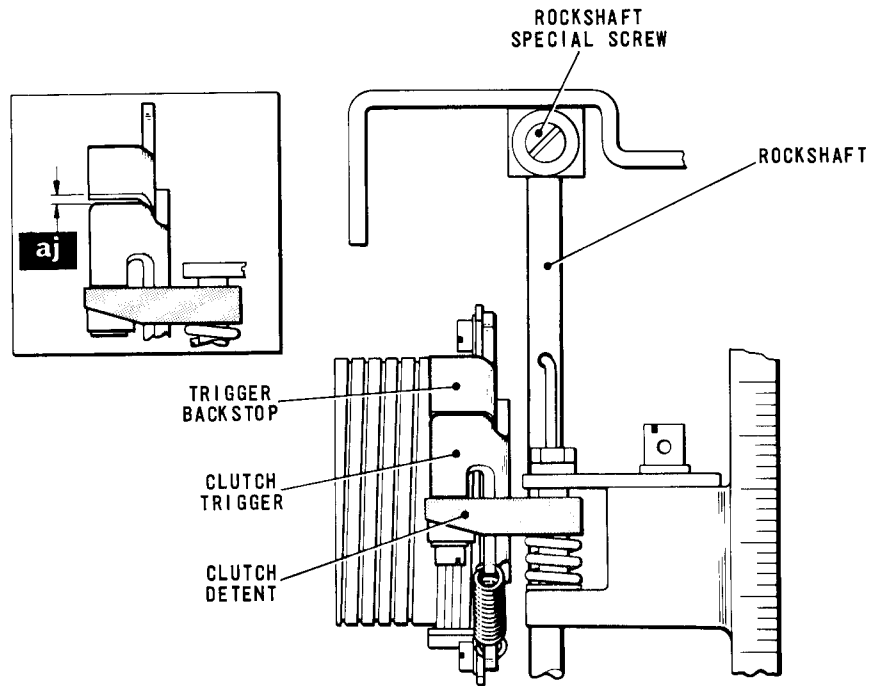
SELECTOR CLUTCH TRIGGER MECHANISM—PLAN VIEW
